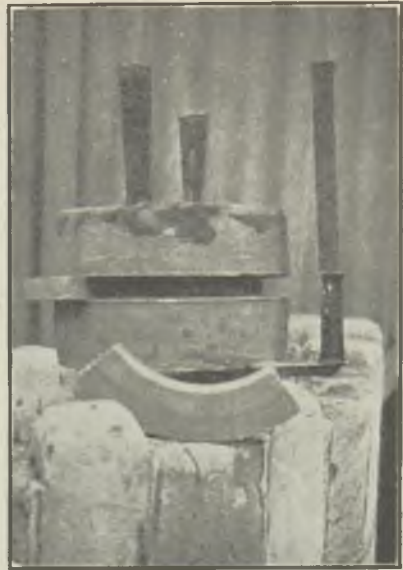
A CONE CASTING LIABLE TO CAUSE TROUBLES.
